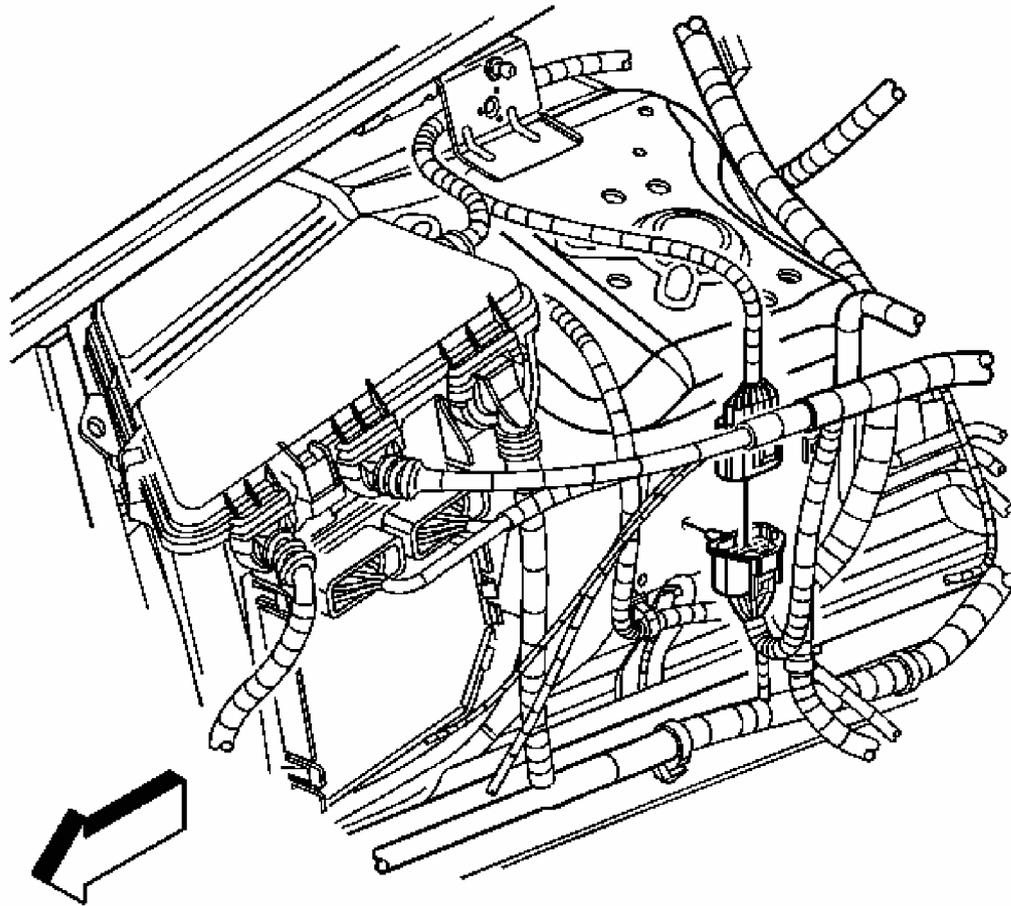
View Of Engine Module Wiring Harness Connectors
